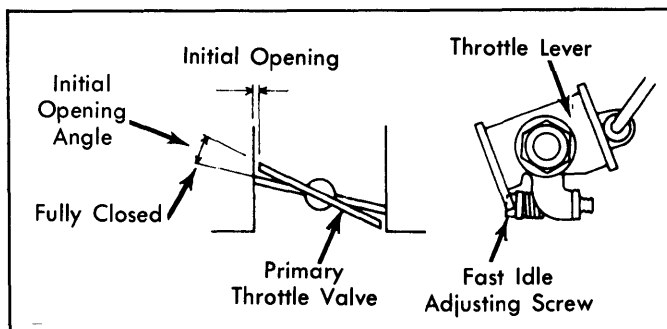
Throttle Valve Initial Opening Angle Adjustment
